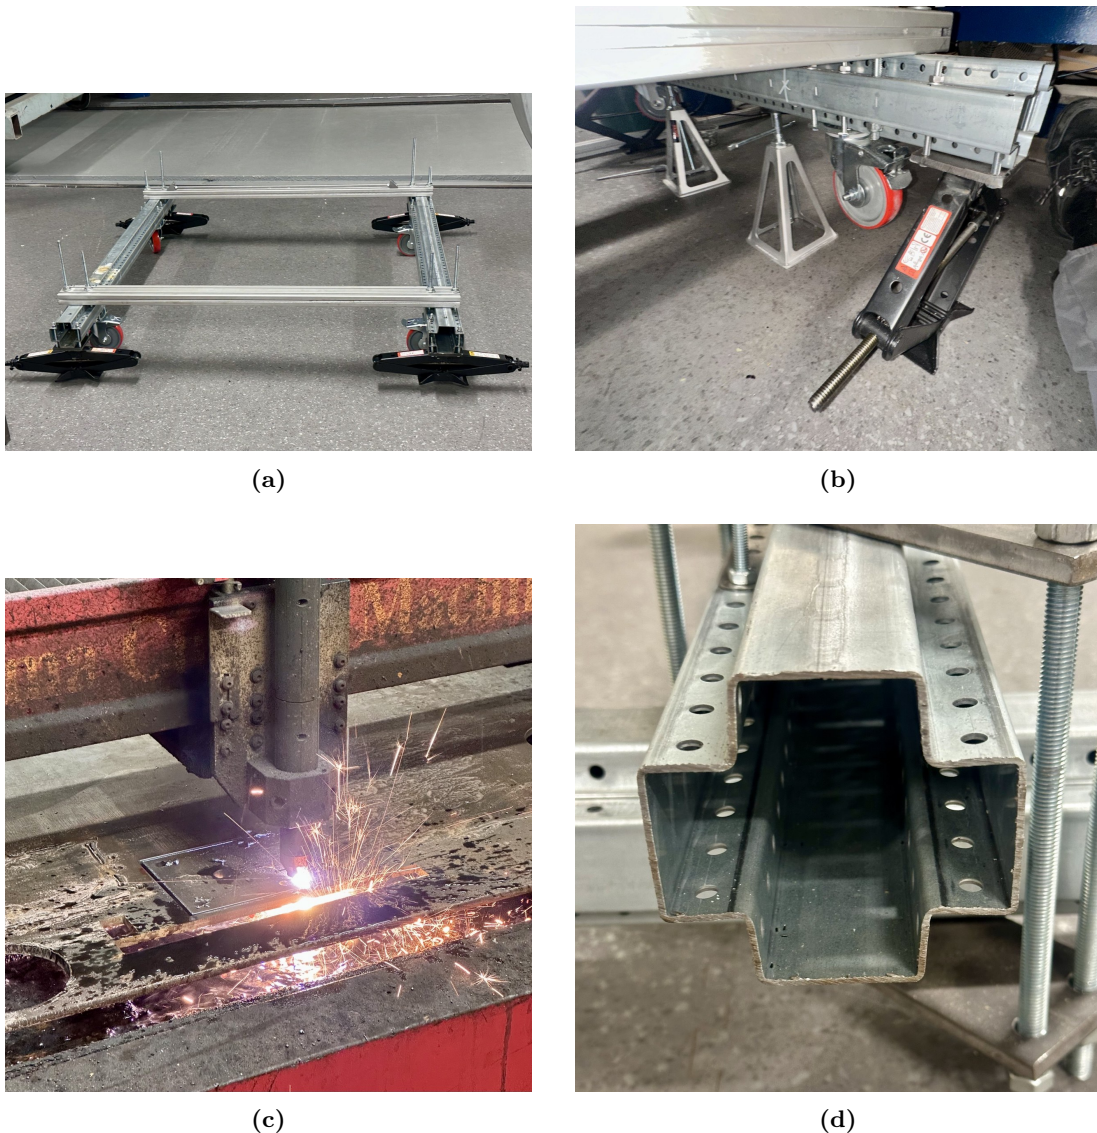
Four views of the baseline frame. (a) Rolling base on four casters with jacks retracted. (b) Jacks raised, secondary stabilisers in place. (c) Custom-machined 8 mm steel plates welded under each jack mount. (d) Imperial cross-section steel channel inherited from the donated assembly.
